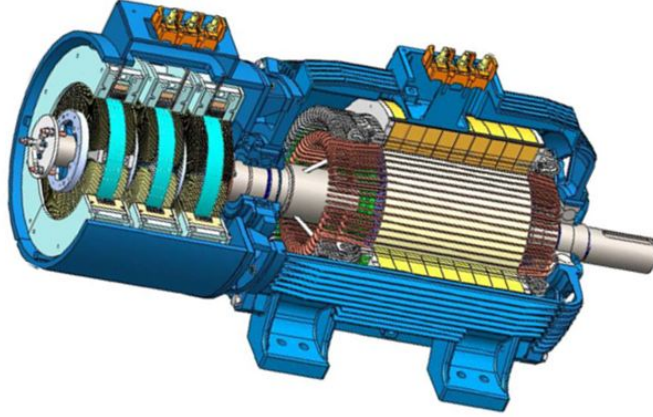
View of a doubly-fed induction machine with rotary transformer [19]
